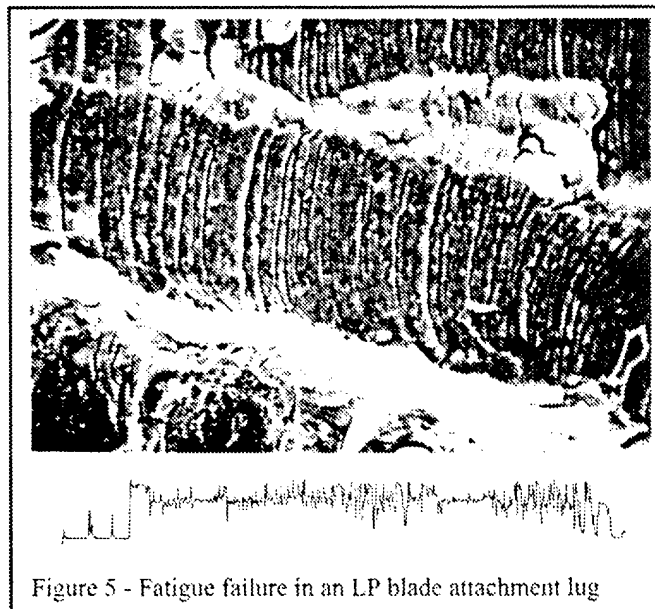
Fatigue failure in an LP blade attachment lug
